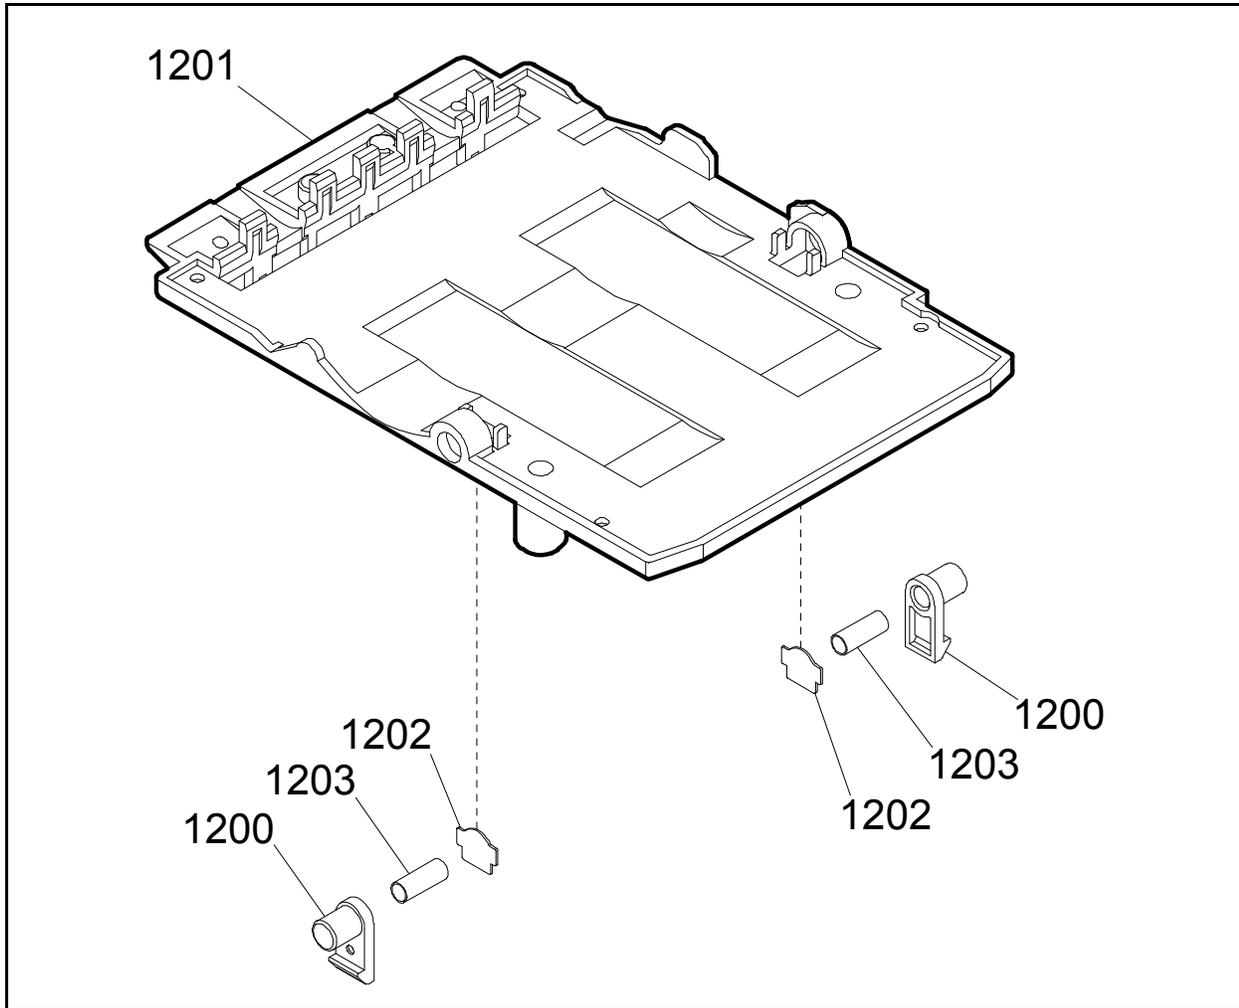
VEGA-RC Twin Bottom Unit Exploded View
